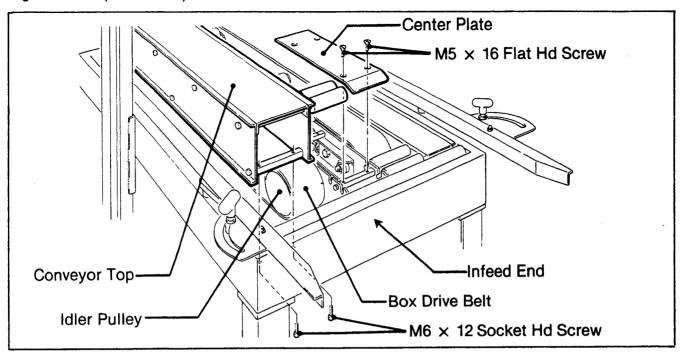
Box Drive Belt Adjustment - Frame Bed Infeed End
